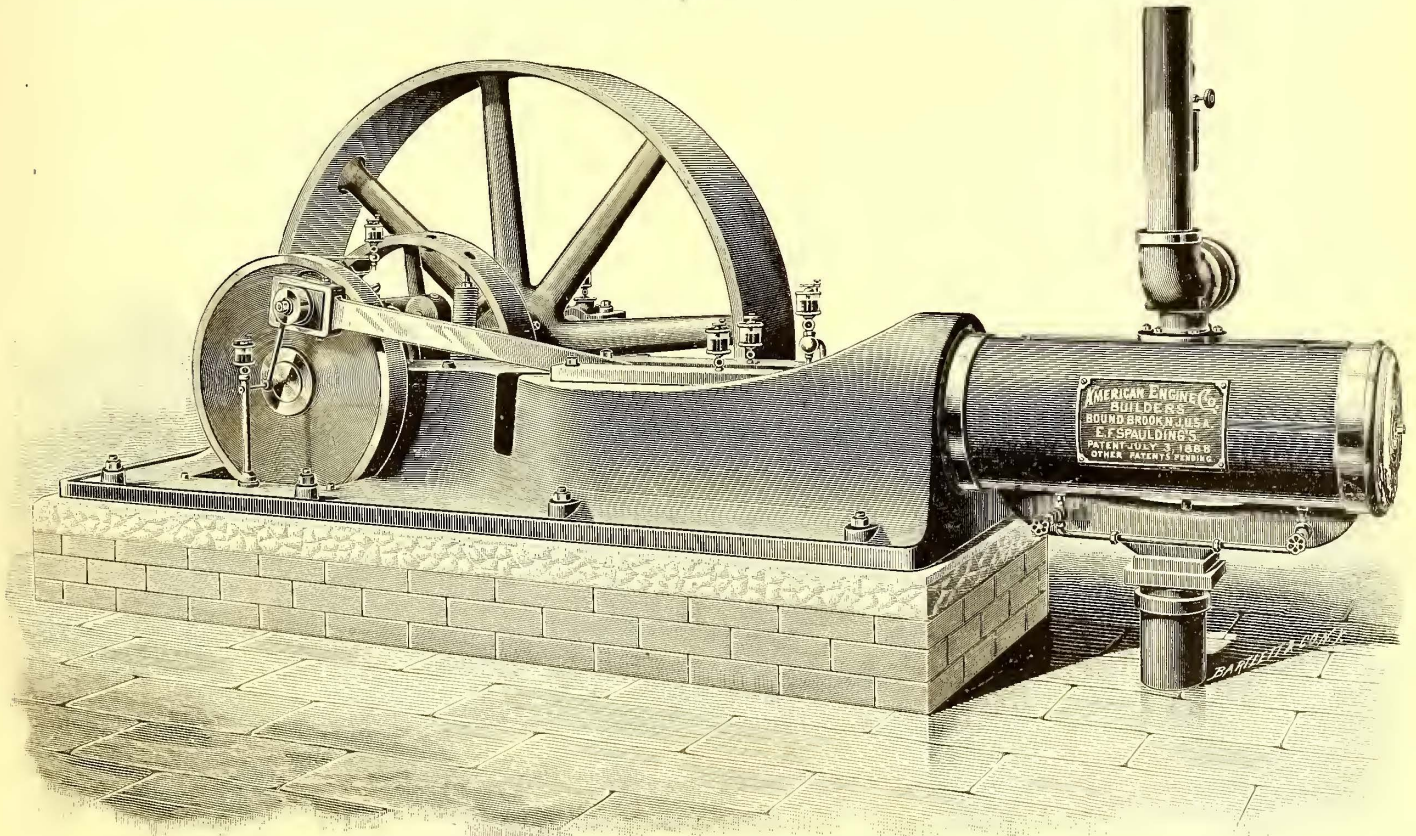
NEW AUTOMATIC ENGINE—AMERICAN ENGINE CO.
